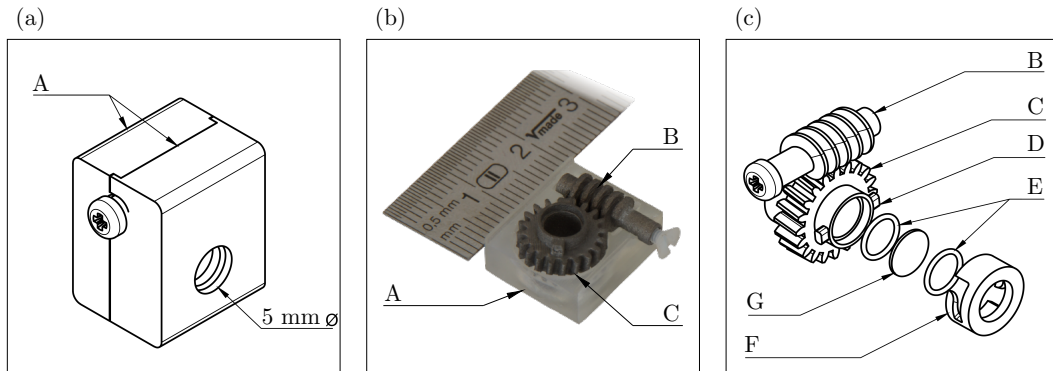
Design of adjustable quarter-waveplate ( $A_{\frac{\lambda}{4}}$ ) a) isometric, b) part assembled and c) exploded views. b) Photograph of titanium printed rotating waveplate mechanism. A: 3D printed enclosure consisting of two push-fit parts with external dimensions ( $17 \times 14 \times 12 \text{ mm}^3$ ). B: Worm drive gear. C: Worm gear where  $n_2 = 20$  and external diameter = 10 mm. D: Locating extrusions for retention cap. E; 5.2 mm diameter O-rings. G; 5 mm diameter quarter-waveplate. F: Waveplate retention cap.
